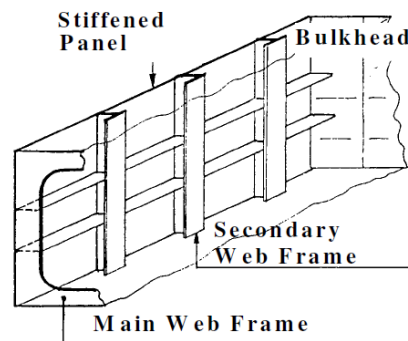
A standard stiffened panel (Rigo and Rizzuto, 2010)
